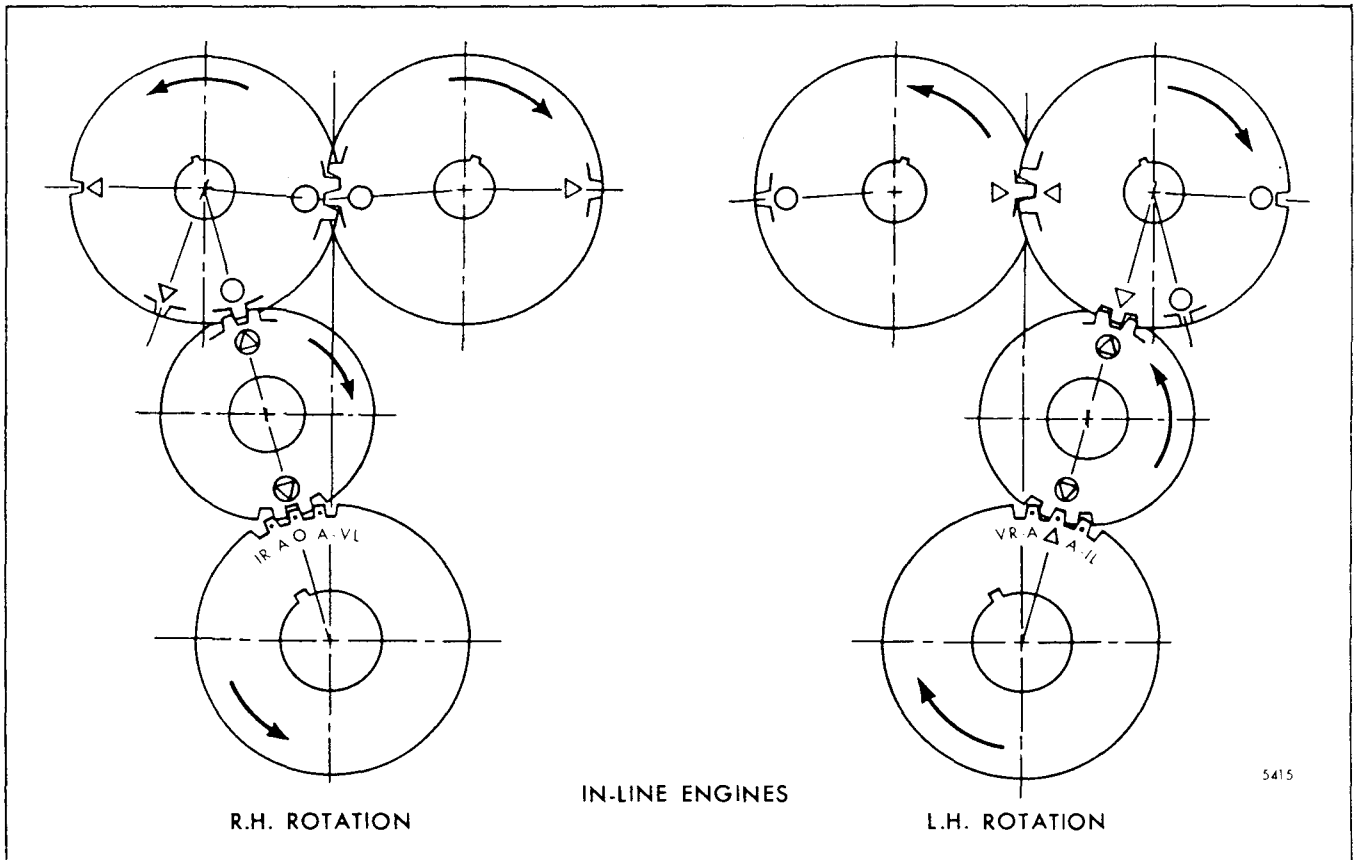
In-Line Engine Gear Train Timing Marks (Standard Timing Shown)
